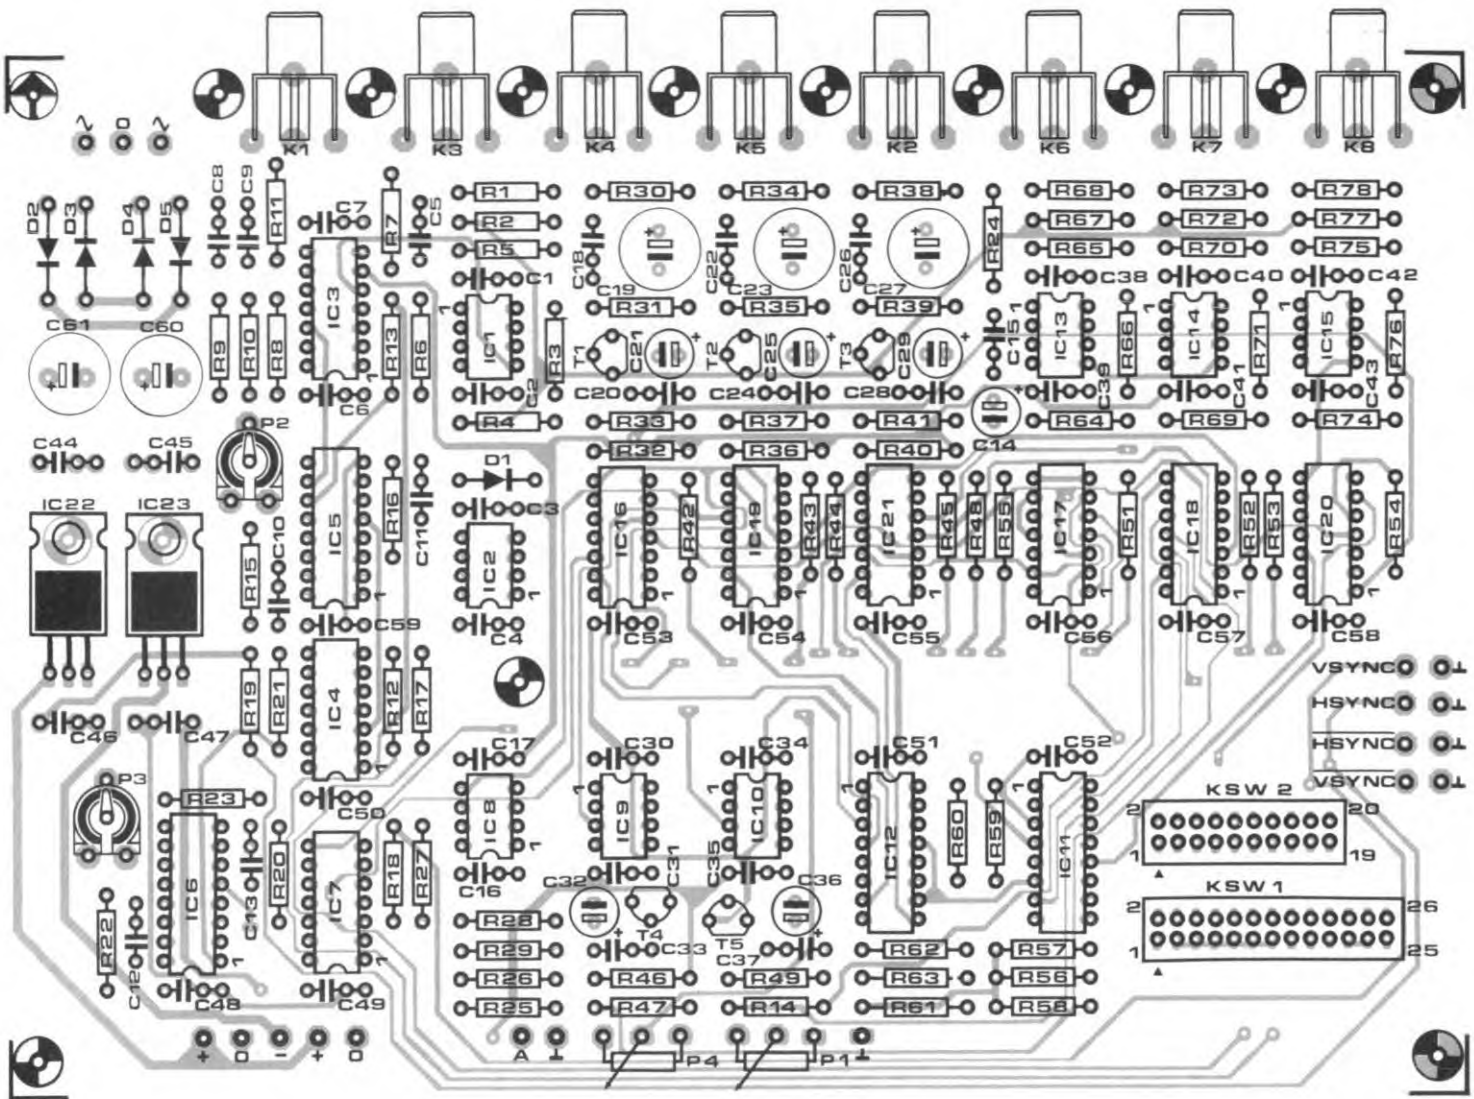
Component mounting plan of the video switching board. The input and output cables are connected to PCB-mount phono sockets.
